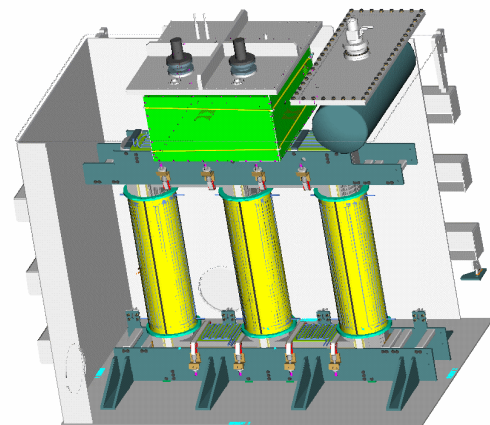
Cutaway sketch of 5/10-MVA transformer (coils not shown).
